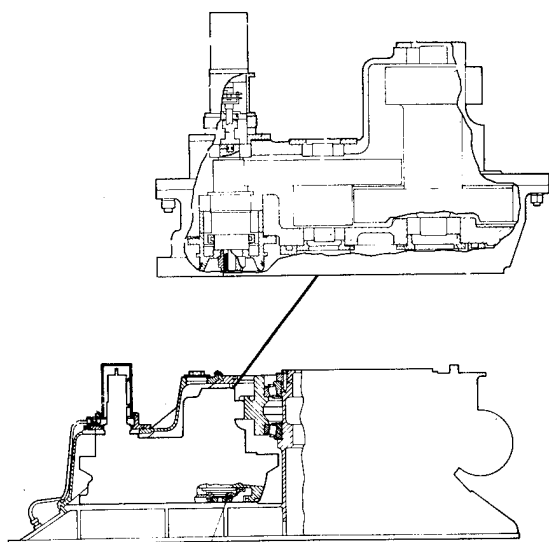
Training Axis Gearcase and Gearbox.
